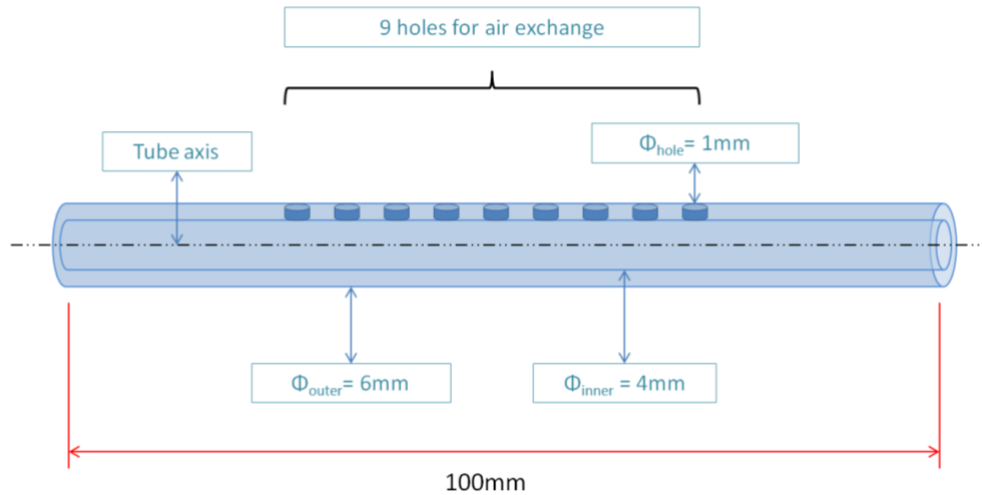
Carbon fiber tube dimensions and hole pattern location.
